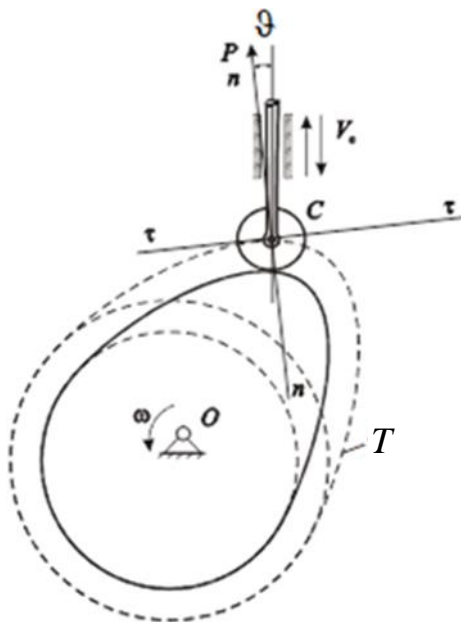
Pressure angle in a cam mechanism with a roller follower moving translationally
